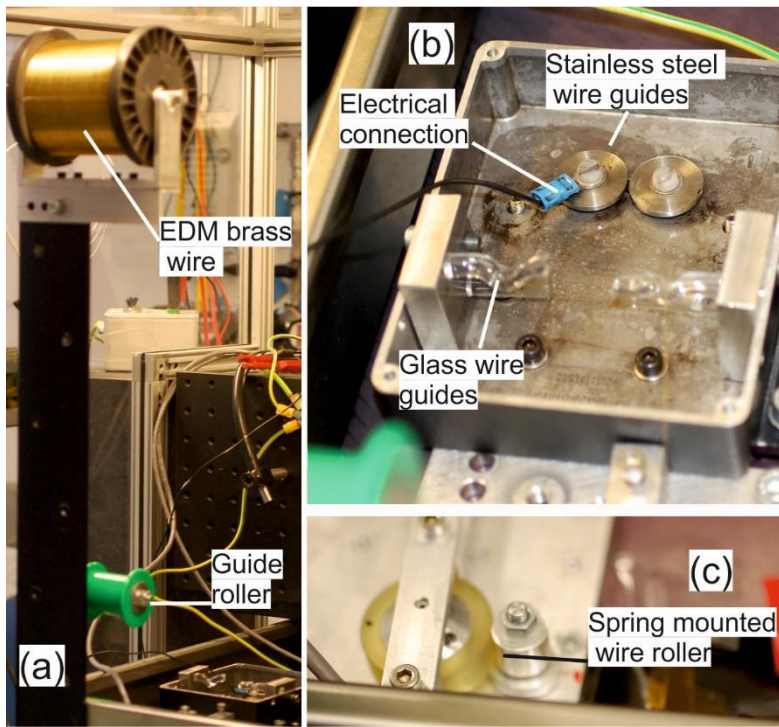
New wire feed system (a) The spool is mounted to the mill tray at a distance ensuring the pulling angle does not cause slippage (b) EDM machining is conducted in tray to allow use of dielectric fluid (c) Spring mounted roller arm to pull wire through
